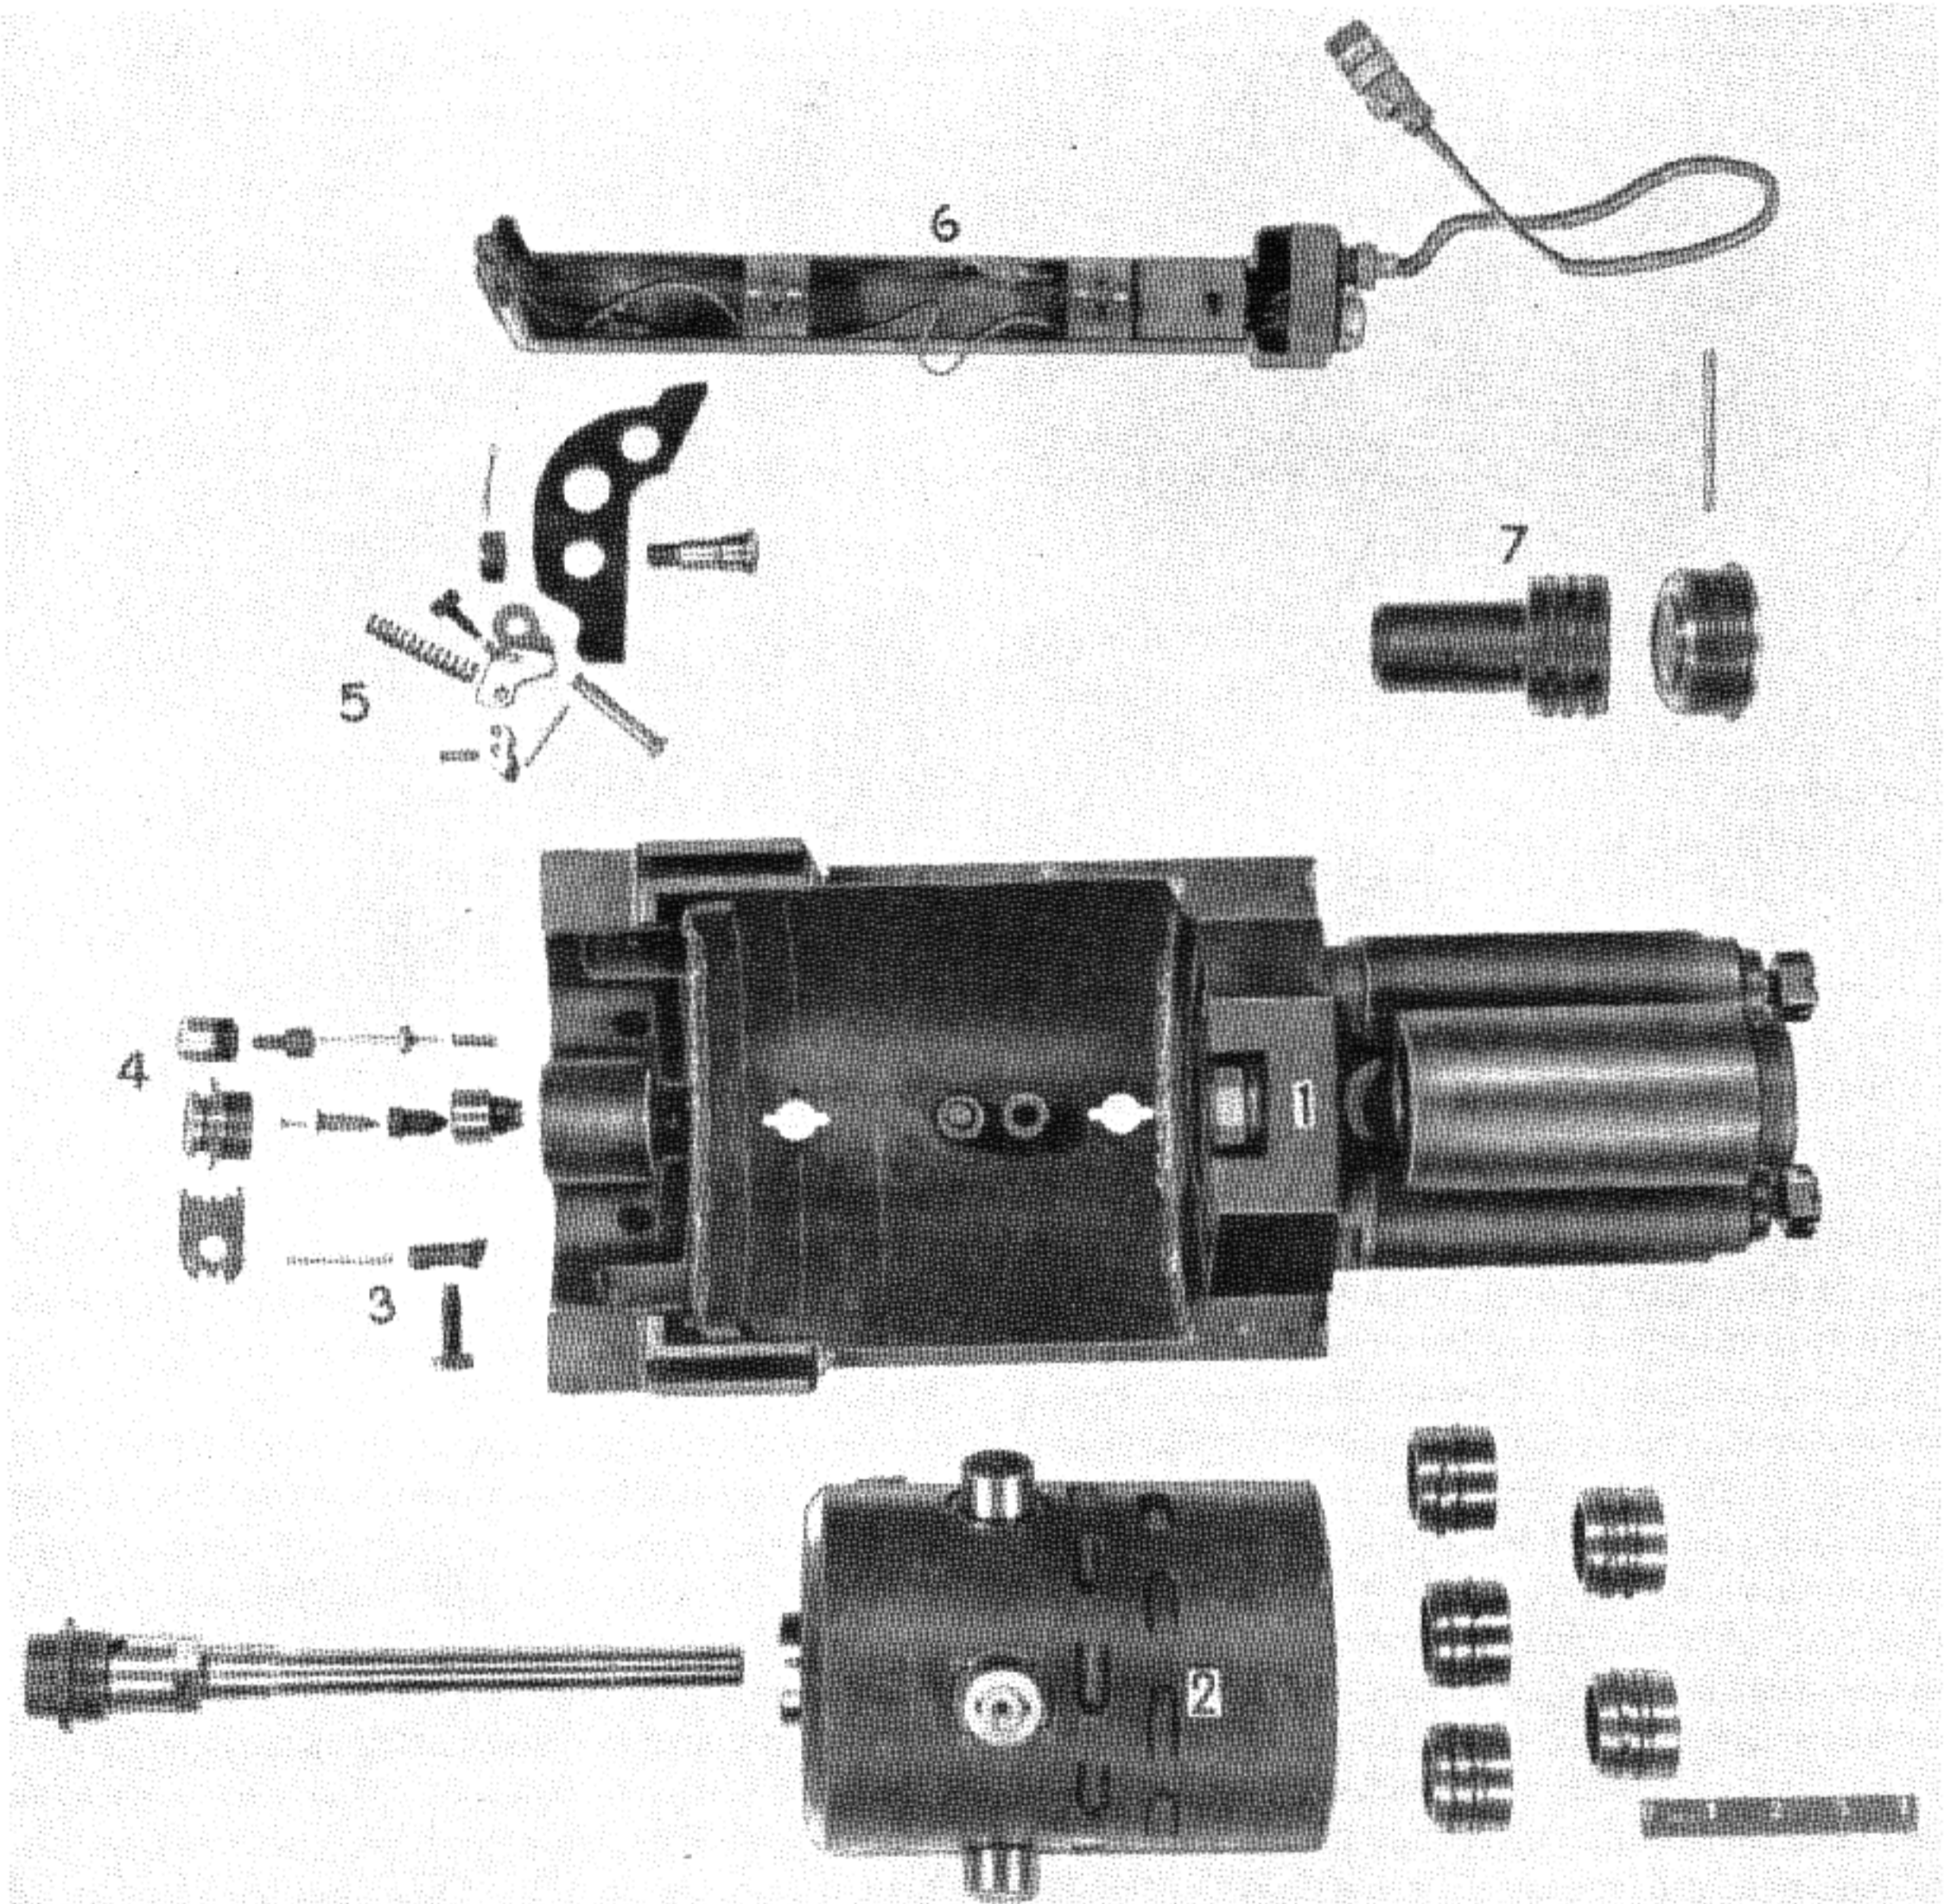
30-mm British Aden Gun. Disassembled view of cylinder housing group. (1) Cylinder housing. (2) Cylinder group. (3) Round retainer assembly. (4) Firing pin assembly. (5) Extractor assembly. (6) Electric housing unit. (7) Gas piston and plug.
